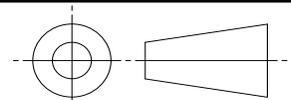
FITTING ASSEMBLY, ADAPTER
